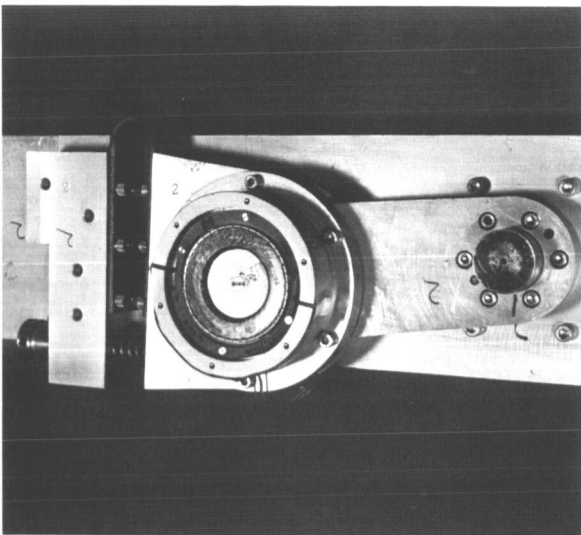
Cross Elevation motor mount installed on gimbal ring. Hairpin-like steel spring is a flexure bearing; coil spring forces motor shaft against drive disc sector.
